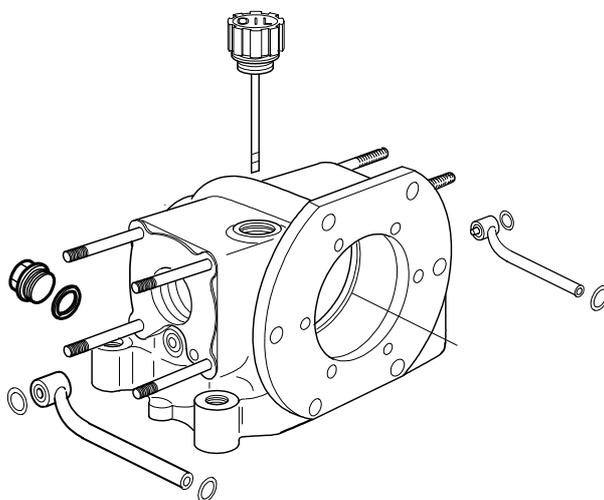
Bearing housing oil filler, level and drain plug
